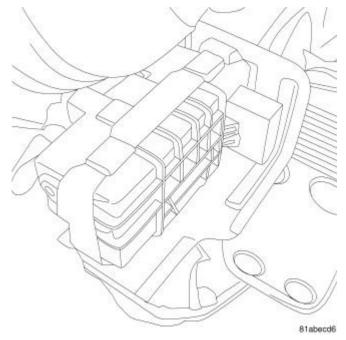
Turbocharger Module Courtesy of CHRYSLER LLC
